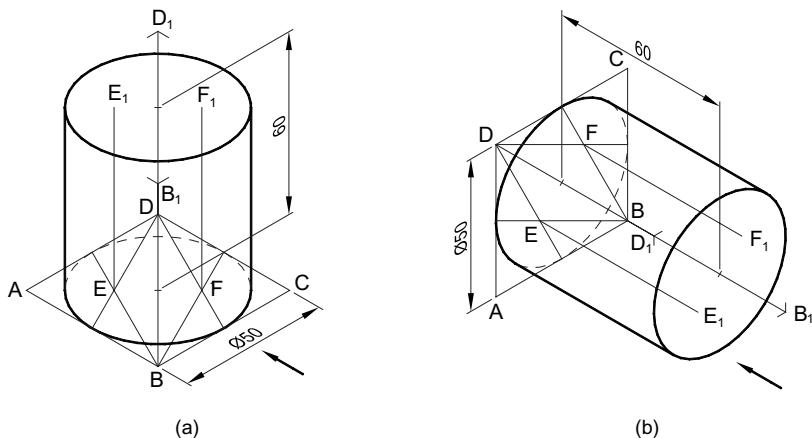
Isometric view of a cylinder having axis perpendicular to the (a) H.P. (b) V.P.
